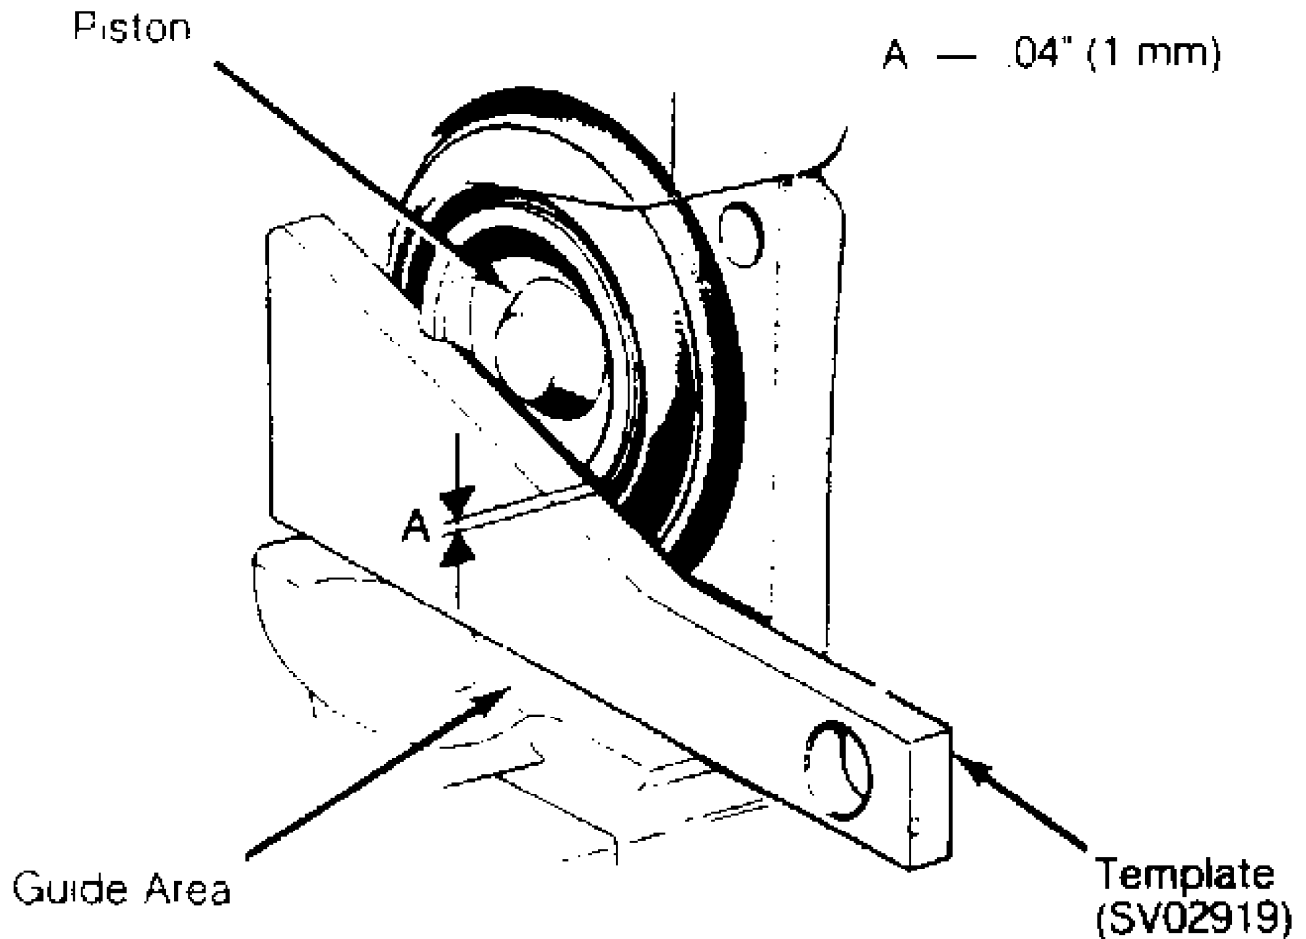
Checking ATE Rear Caliper Piston Angle To Avoid Brake Squeal
